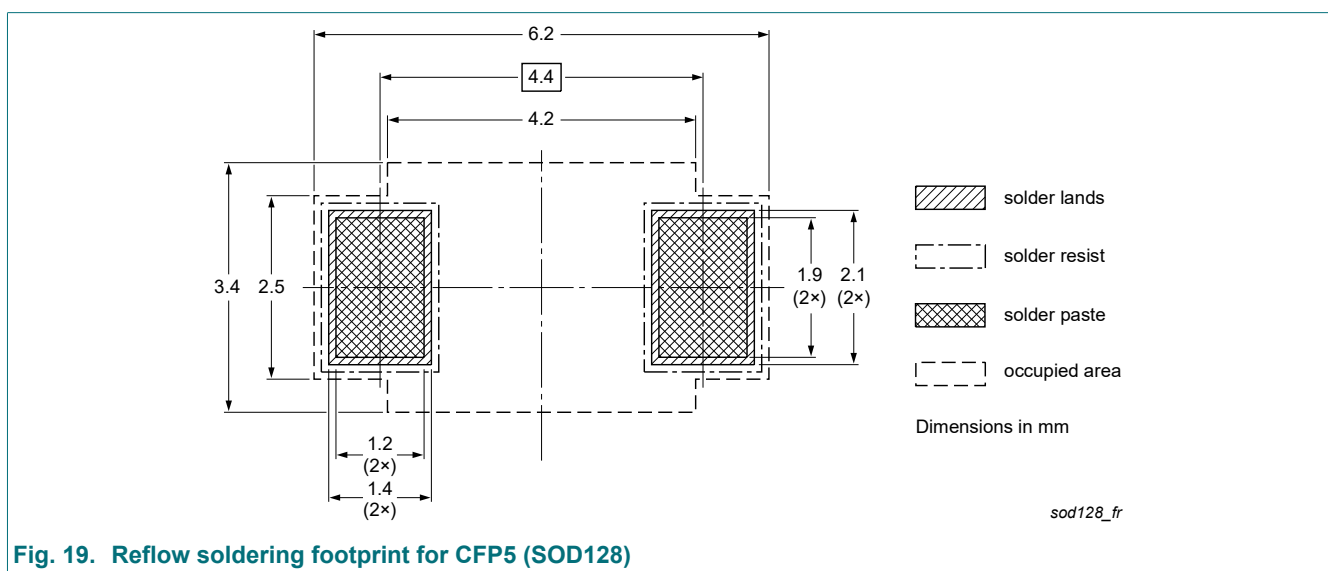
Reflow soldering footprint for CFP5 (SOD128)
